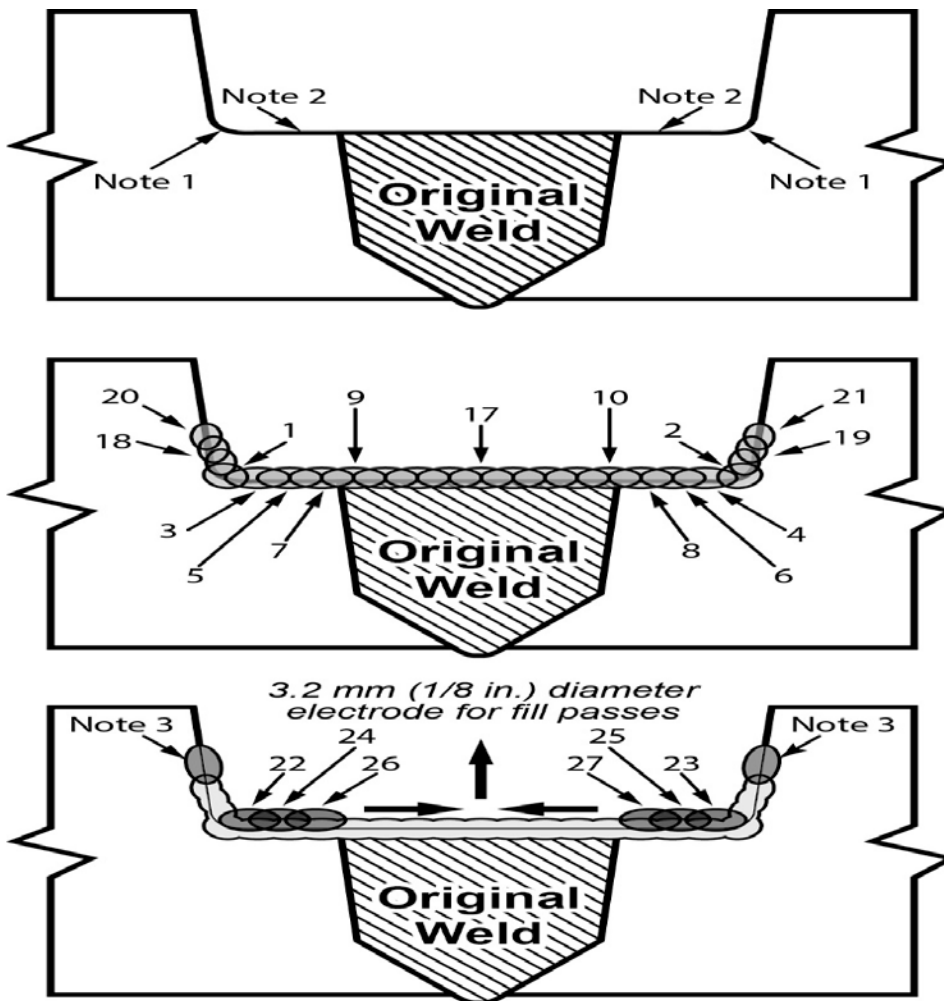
Schematic of the Controlled Fill Welding Procedure for Grade 91 Steel for a Partial Penetration Weld Repair .
